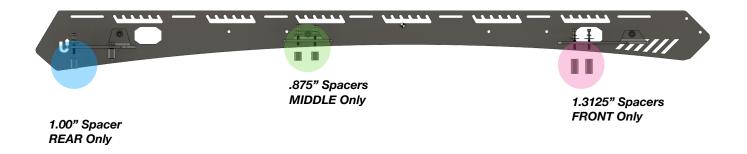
Subaru Spacer Placement Shown Drivers Side-Inside View
